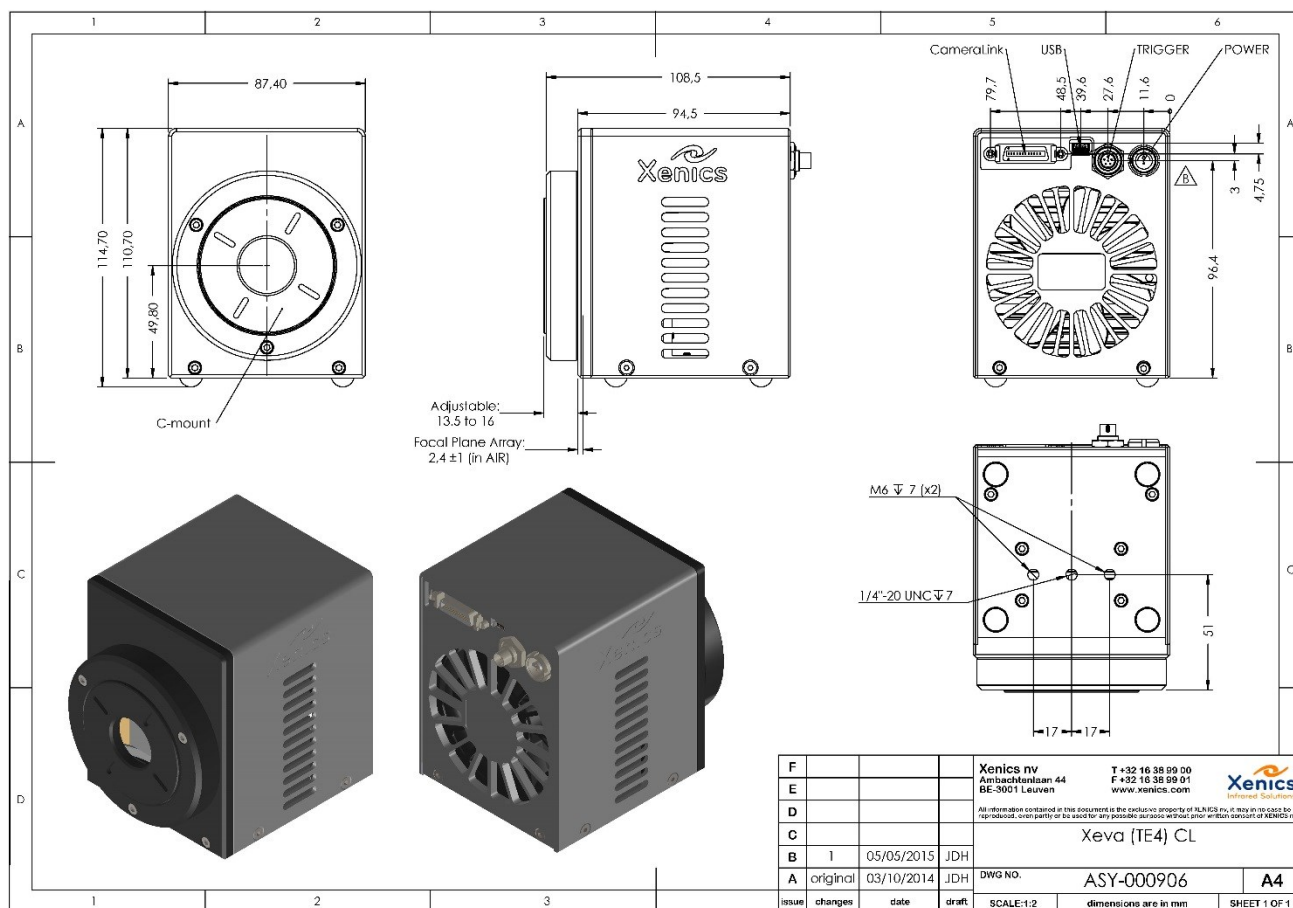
Mechanical drawing Xeva-T2SL-2.35-320-TE4
